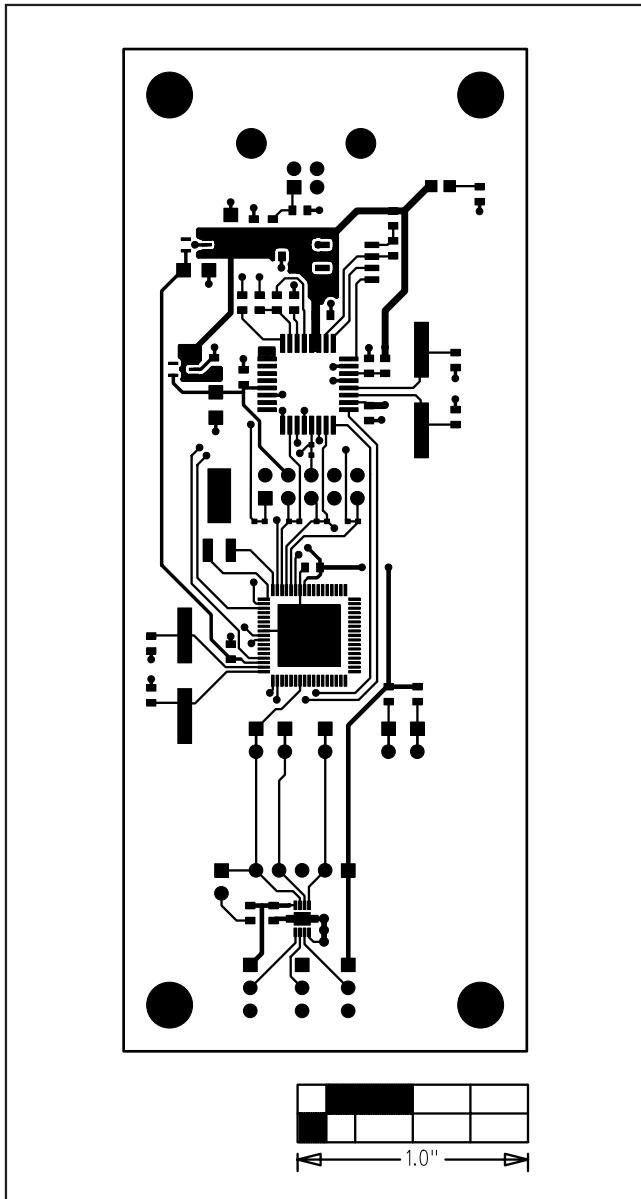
MAX6604 EV Kit PCB Layout—Component Side
